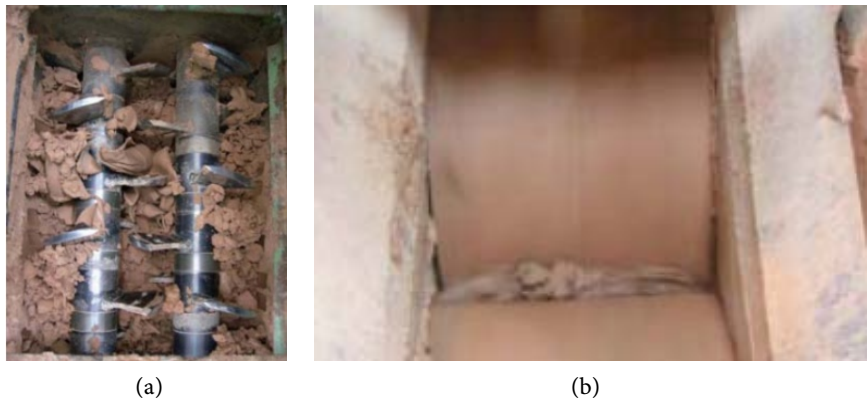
Heavy clay machine. (a) Pugmill; (b) Roller mill.
